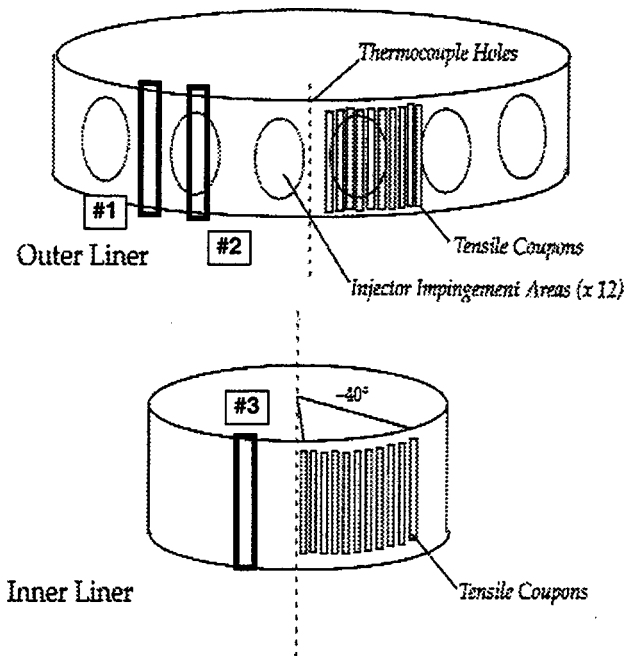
Schematic of specimens cut from inner and outer CFCC combustor liners after ARCO test
